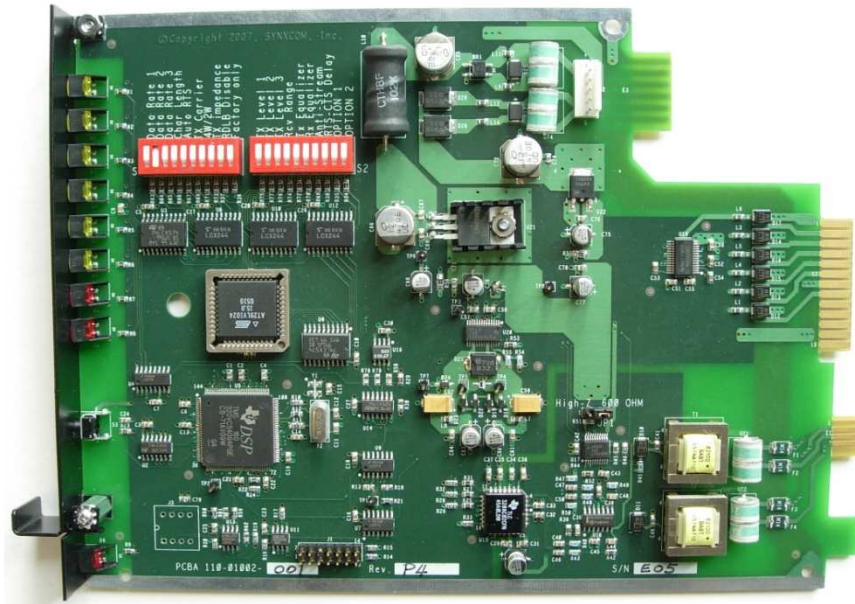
Rack-Mount Module for the SM19202FP-RM Modem Board
